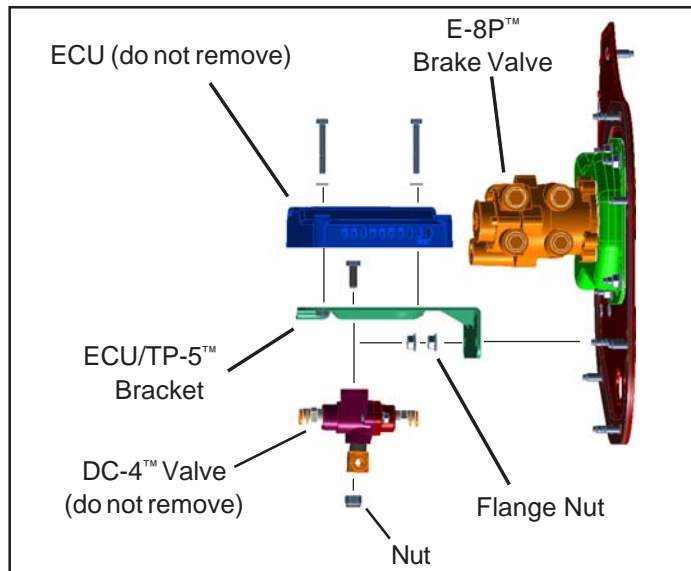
(Type B) Bracket with ECU and a DC-4™ Double Check Valve
